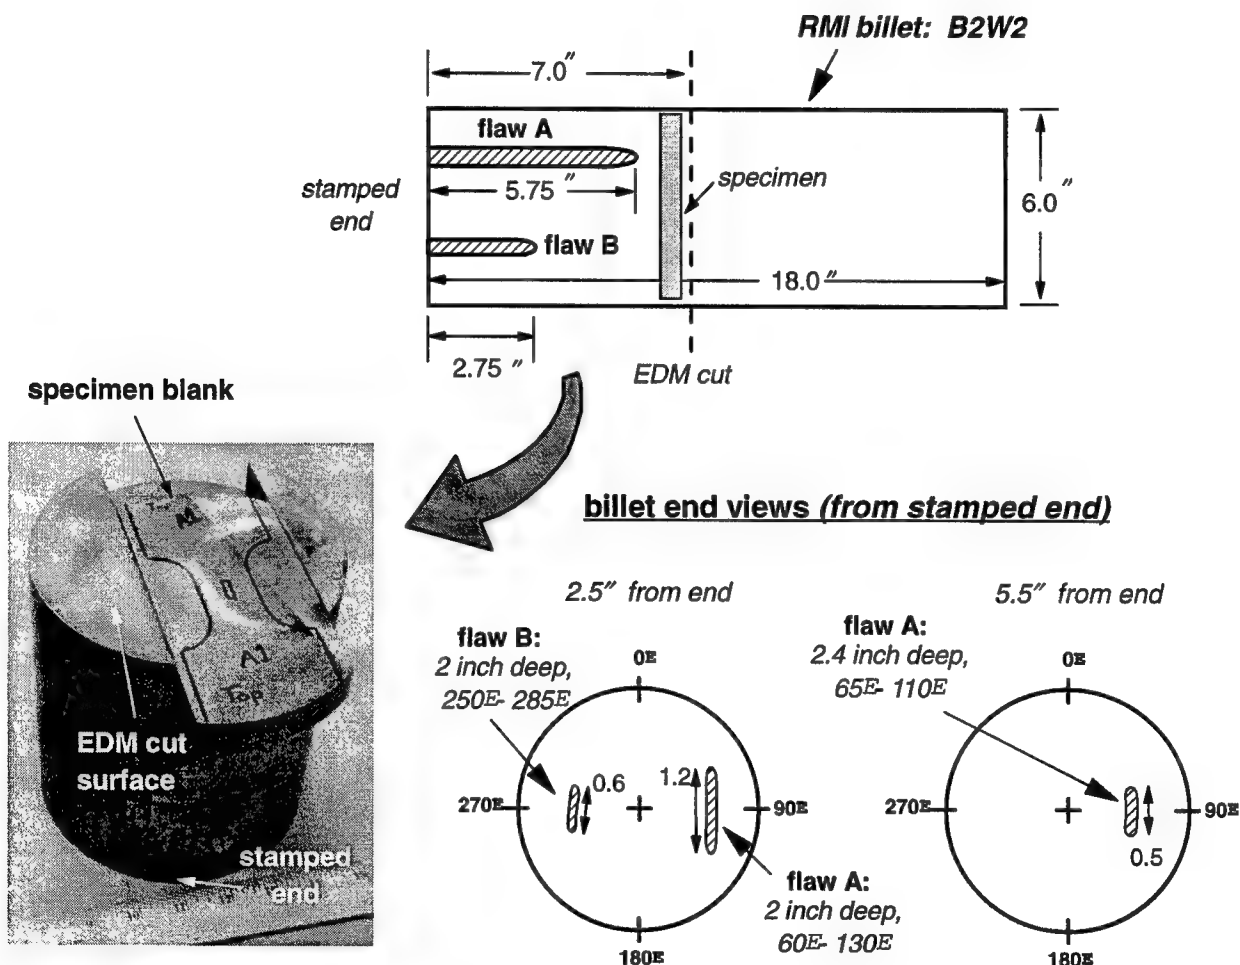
PHOTOGRAPH OF THE BLANK REMOVED FROM THE RMI BILLET B2W2
